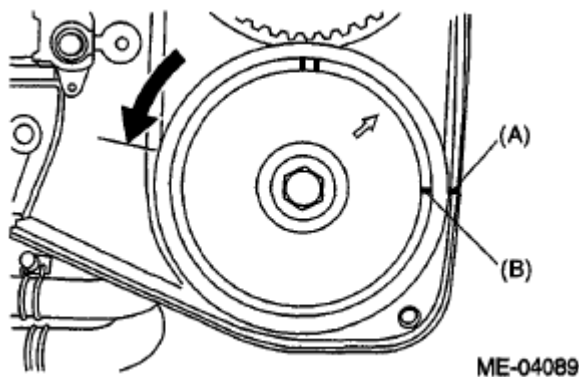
Identifying Alignment Mark On Exhaust Cam Sprocket LH Single Line Mark With Timing Belt Cover Notch
